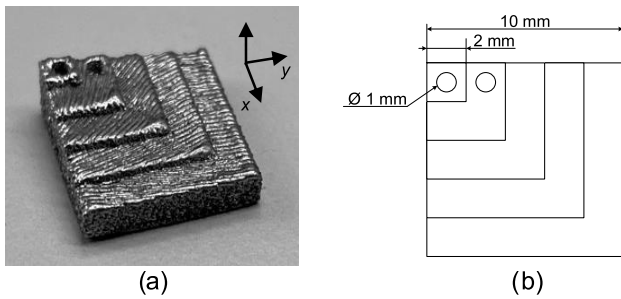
(a) Image of the specimen after manufacturing and removal of build platform. (b) 2-D drawing of top side of test specimen showing dimensions in x - and y -directions.
